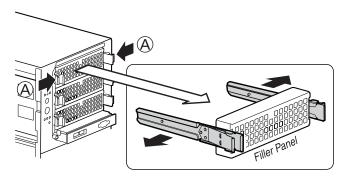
Removing Slide/Filler Panel Assembly from Upper Device Bay
